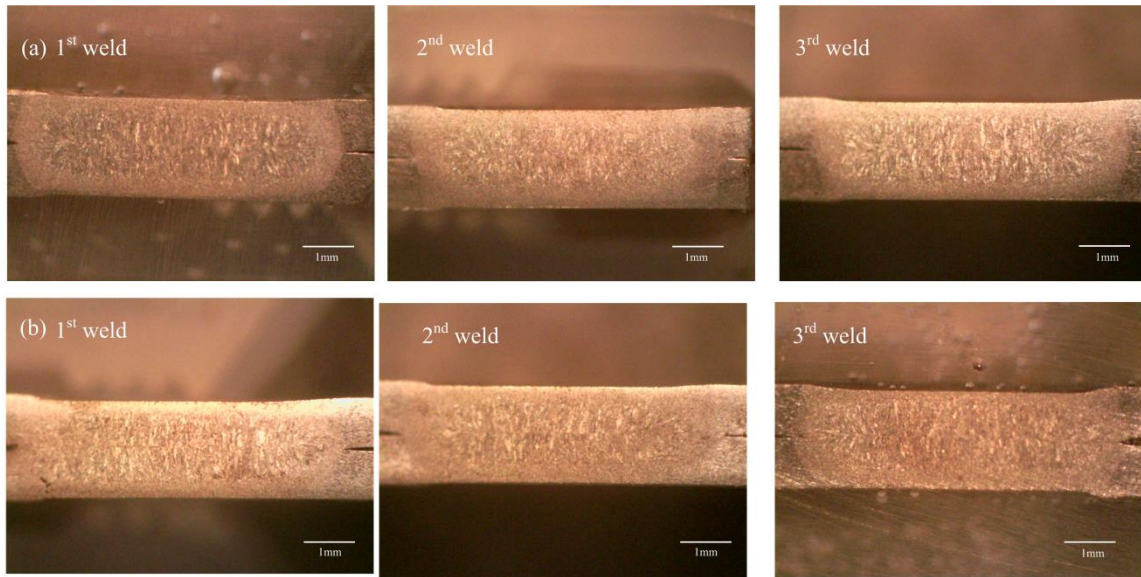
Longitudinal-sectional views of the double shunted welds made on a 1-mm mild steel, with weld spacing of (a) 8 mm and (b) 15 mm.
